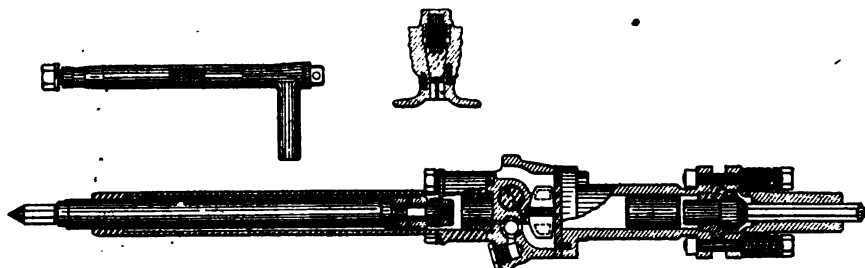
SECTIONAL VIEW OF STOPPER.
